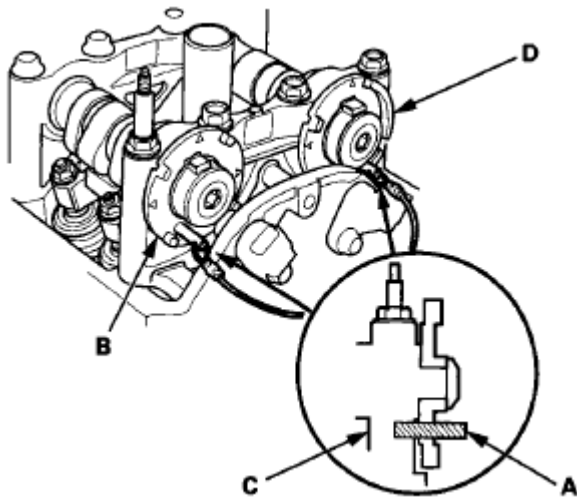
Identifying Camshaft Position Pulse Plate And No. 5 Rocker Shaft Holder
